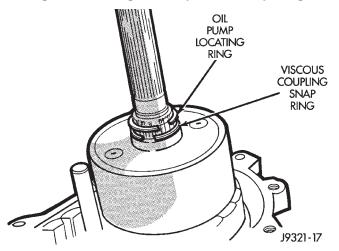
Viscous Coupling And Oil Pump Ring Installation
